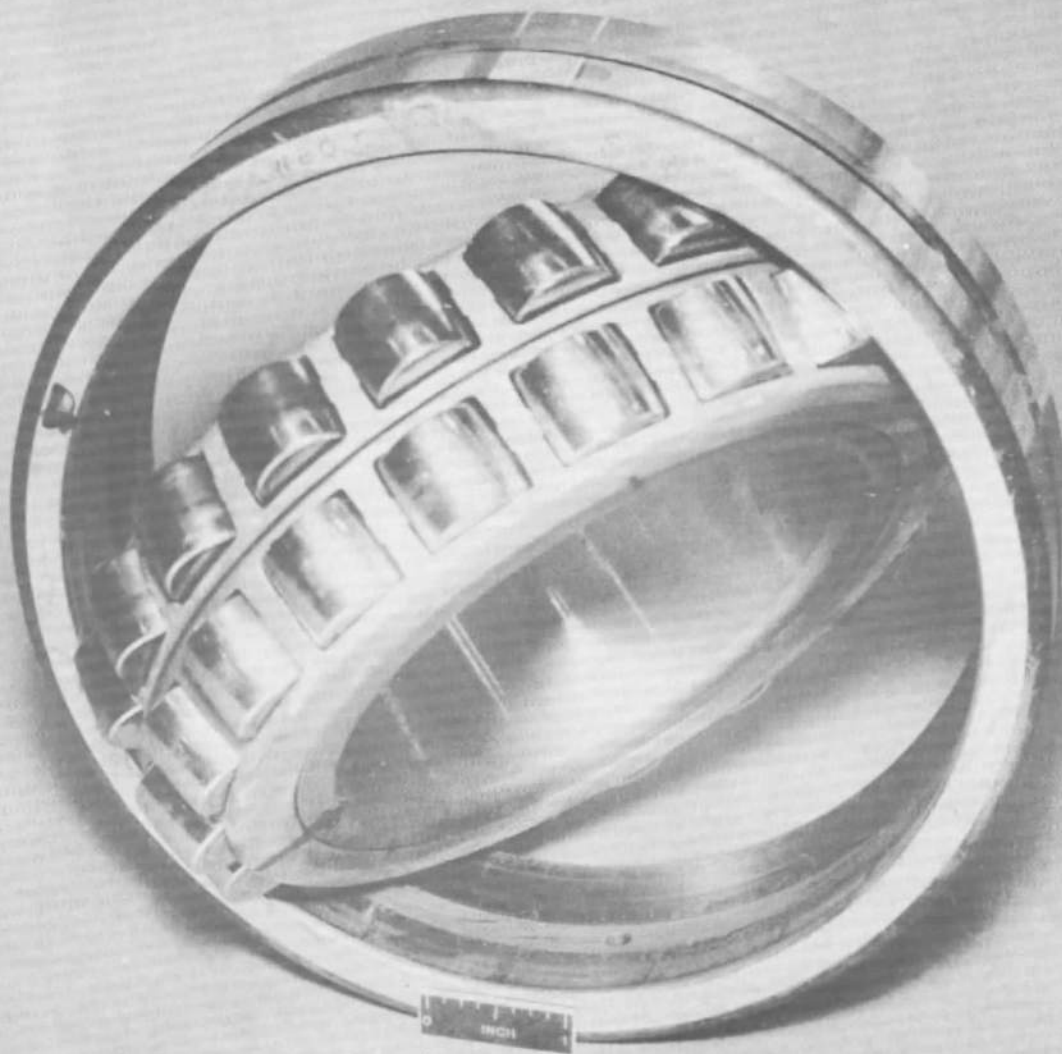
Test No. 1 View of 100 mm Full Assembly Spherical Roller Bearing after Running 26.6 Hours on a Film of MoS_2 and Epoxy Binder-One Set of Rollers is Polished, The Other Set Has Picked Up a Thin Film of Lubricant
